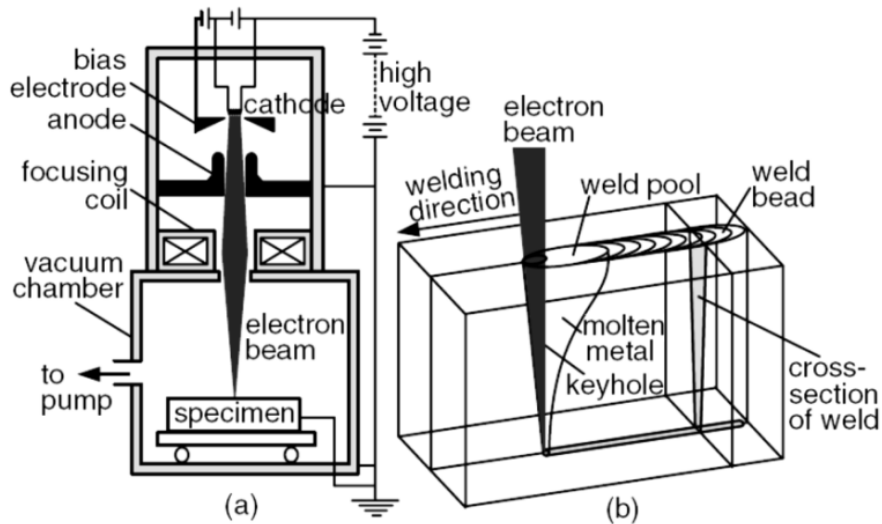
Electron beam welding: (a) process and (b) a keyhole formed during the welding process [Kou, 2002].
